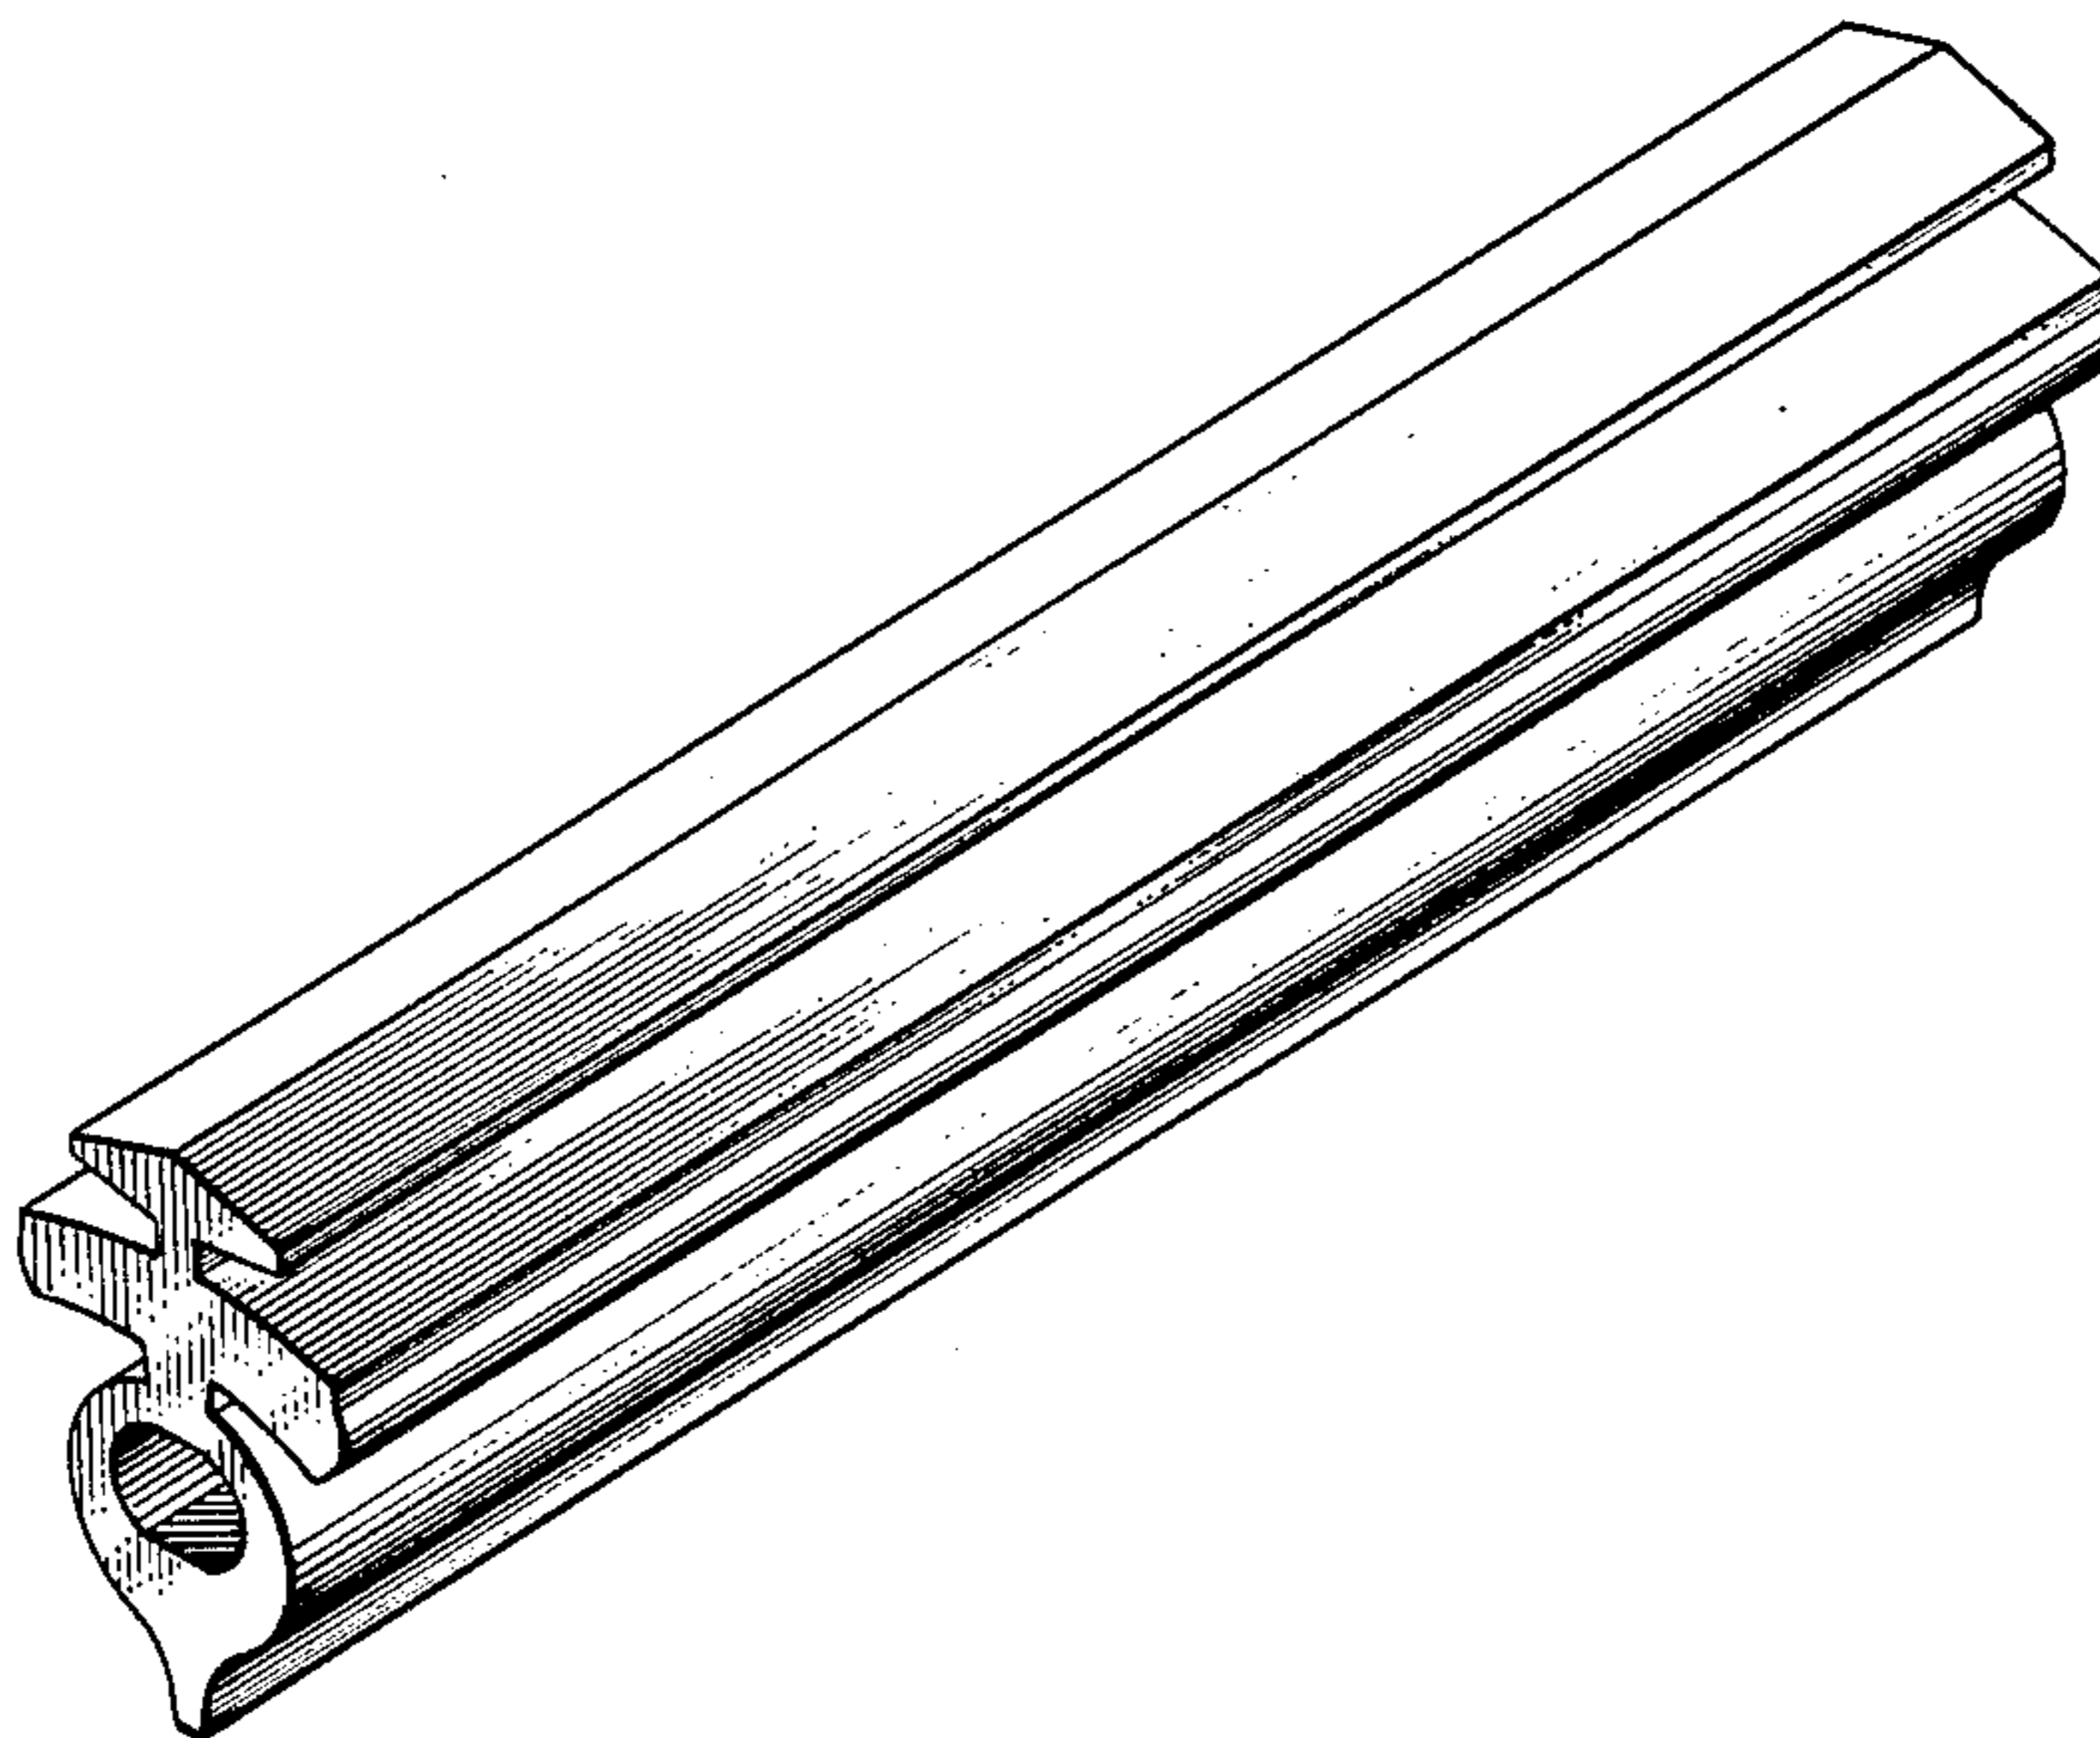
is an isometric view as seen from the top, one side and one end of a windshield wiper blade showing my new design;
